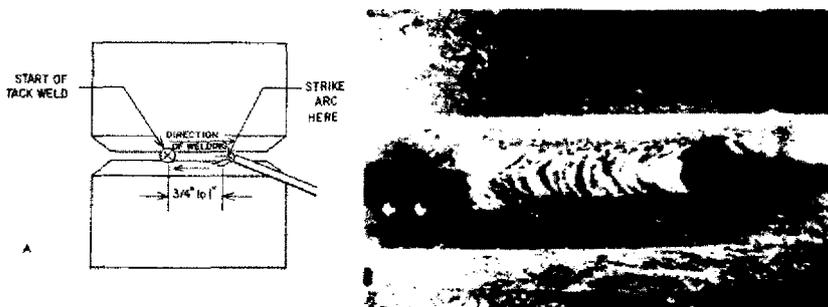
A. Method of striking the arc ahead of the tack weld; B. The keyhole.
